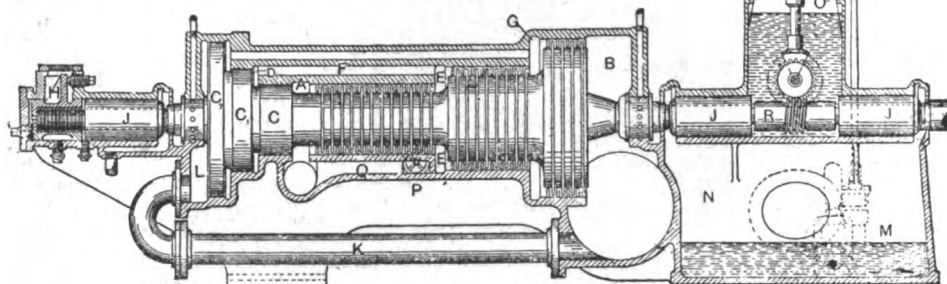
LONGITUDINAL SECTION THROUGH WESTINGHOUSE-PARSONS TURBINE.
